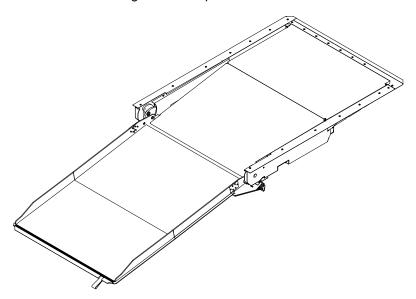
RICON FOLDOVER SINGLE-SLOPE RAMP
